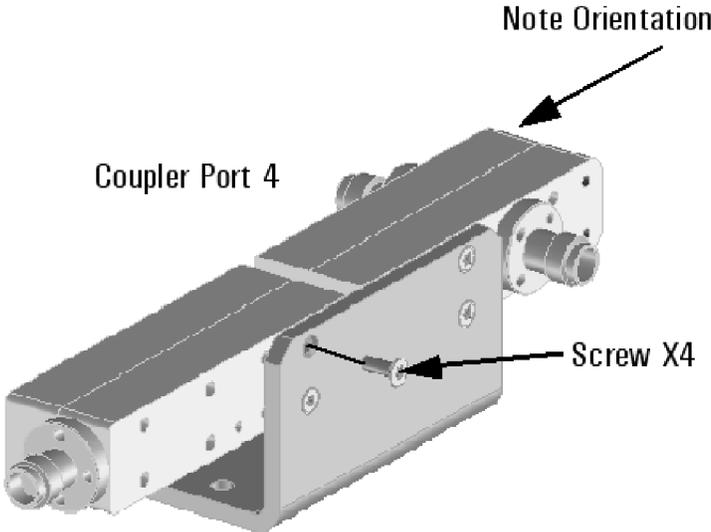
A34 Receiver Coupler Port 3 Assembly (5087-7760, N5245-00017, 0515-1602 (x4))
